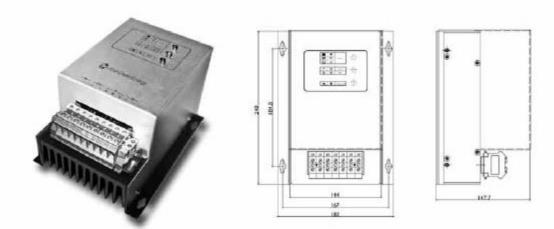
UGE-600-OGC dimensions (all units in mm)
